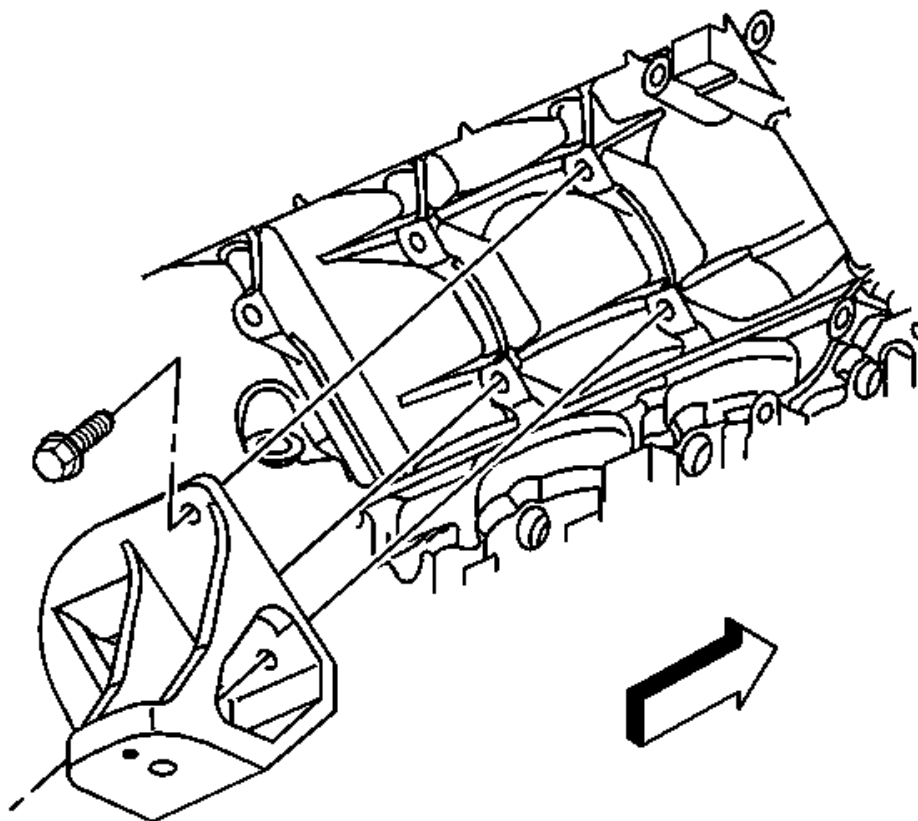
View Of Fuel Rail Covers & Right Engine Mount Bracket
